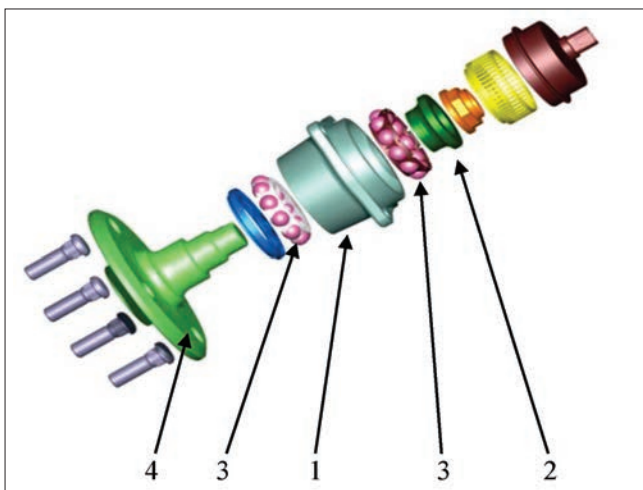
An example of a design solution for a road wheel bearing with a third generation hub bearing with the use of a ball bearing structure: 1 – flanged outer ring, 2 – typical bearing inner ring, 3 – ball basket, 4 – flanged inner ring
